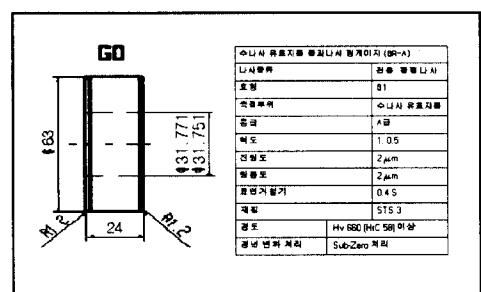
Ring gauge for parallel pipe screw thread - Minor diameter
